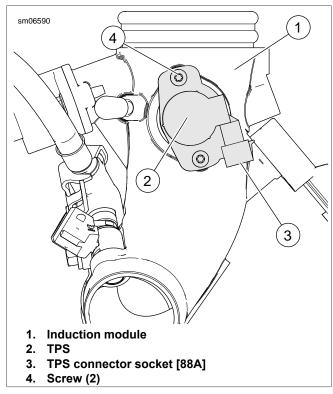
Throttle Position Sensor (TPS) Removal: XR 1200X
